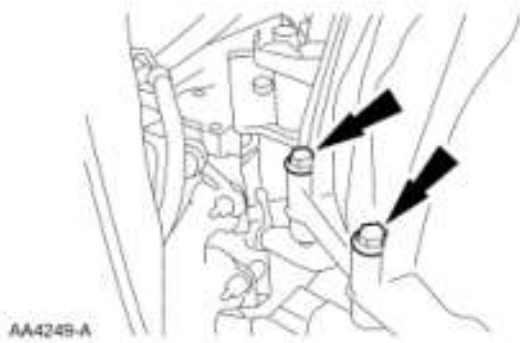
Installing Lower Transmission-To-Engine Bolts
